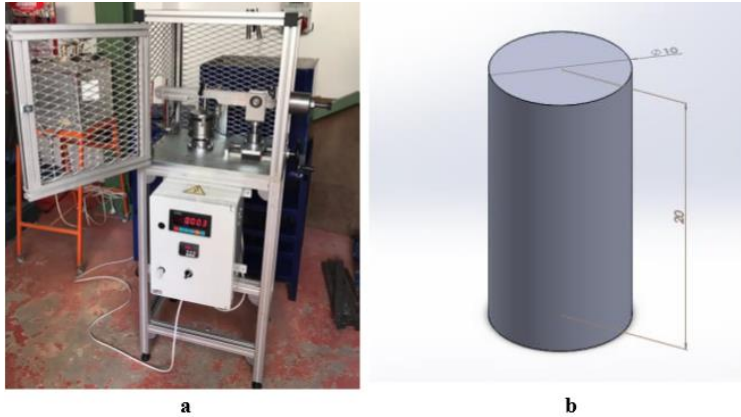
a) Adhesive Wear Testing Machine, b) Test Specimen Dimensions
